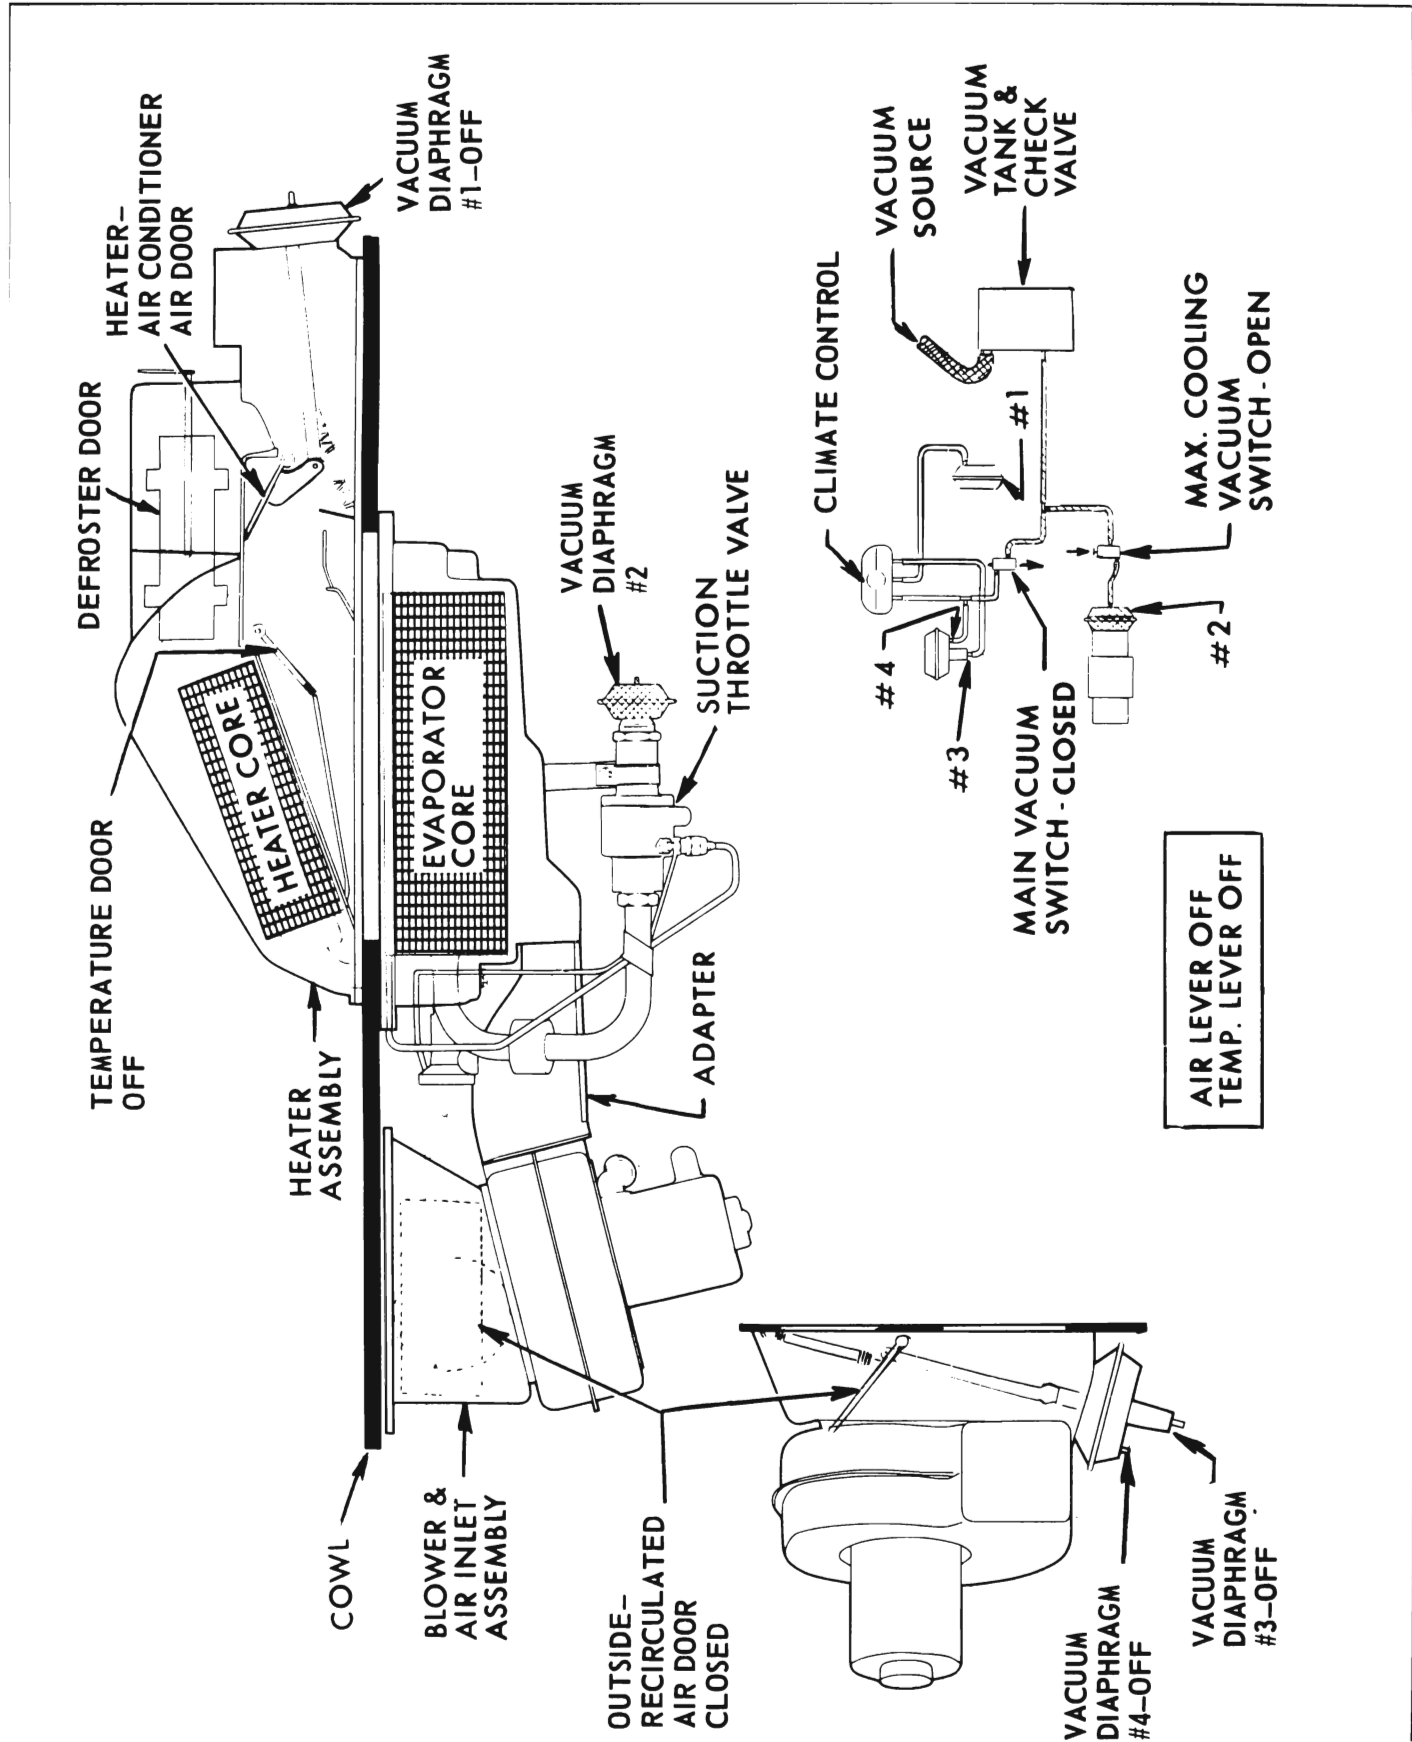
Air Conditioner and Heater Off - 4400, 4600 and 4800 Series
